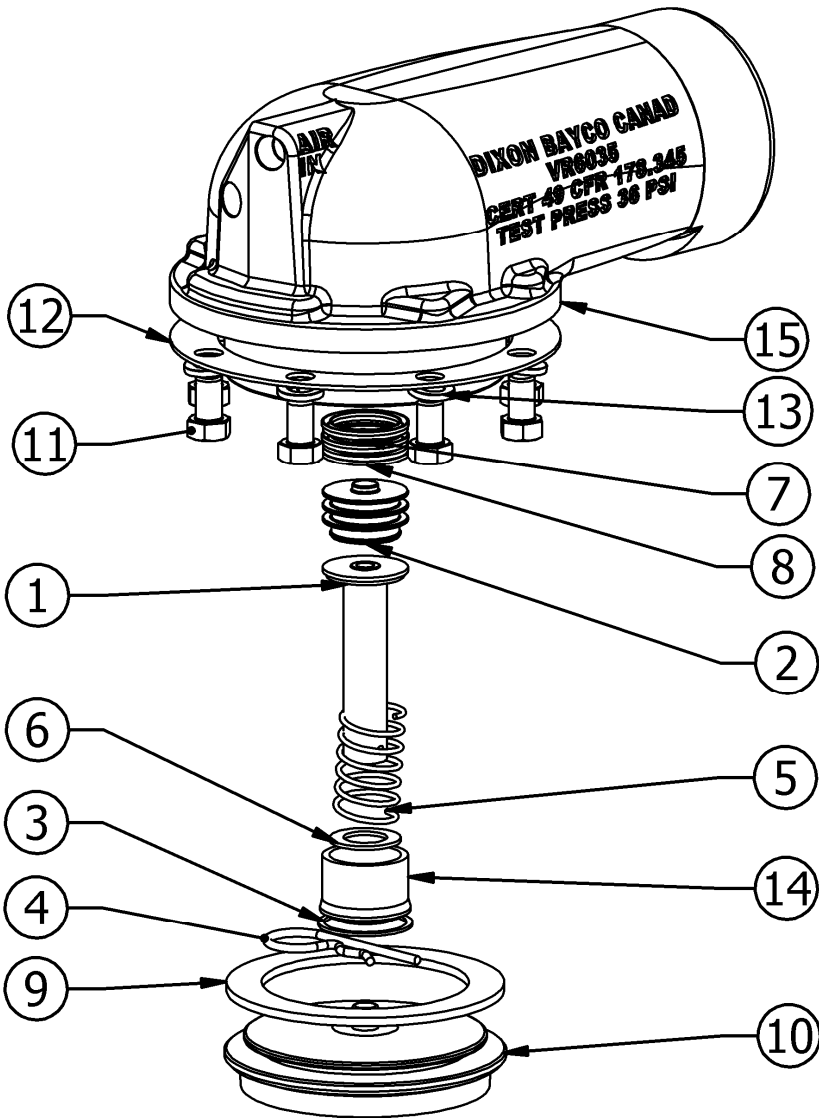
Exploded view of VR6035SQ & VR6035SQV
